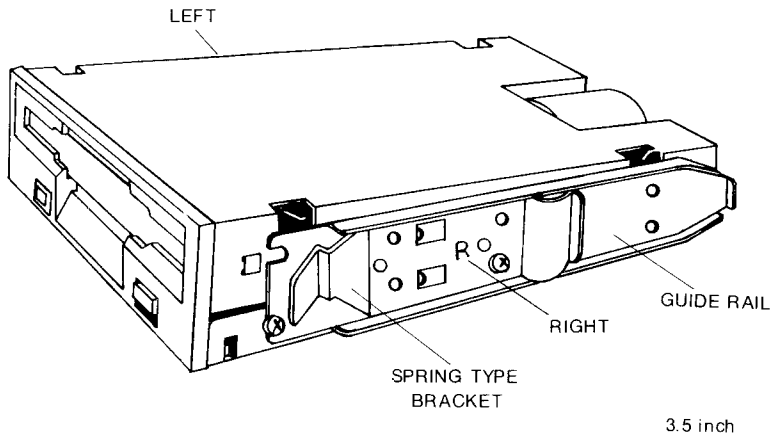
Guide Rail and Bracket mounted on side of 3.5 inch FDD
